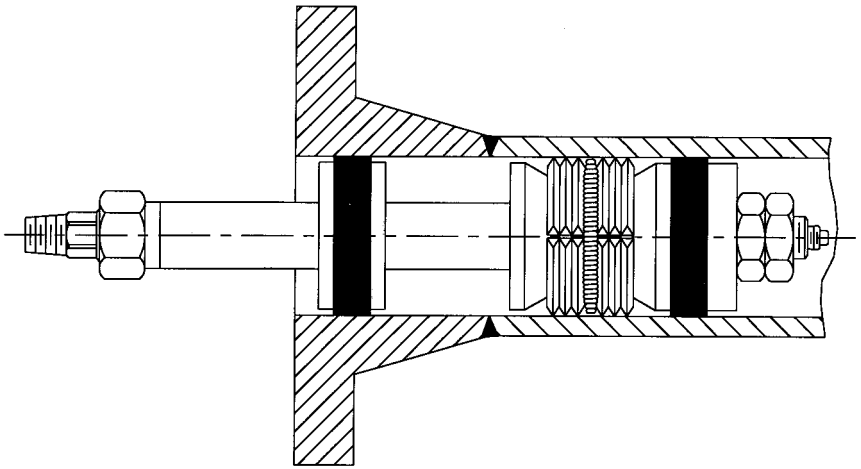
Flange test plug and flange weld plug. (Courtesy of Expansion Seal Technologies, Harleysville, PA.)
